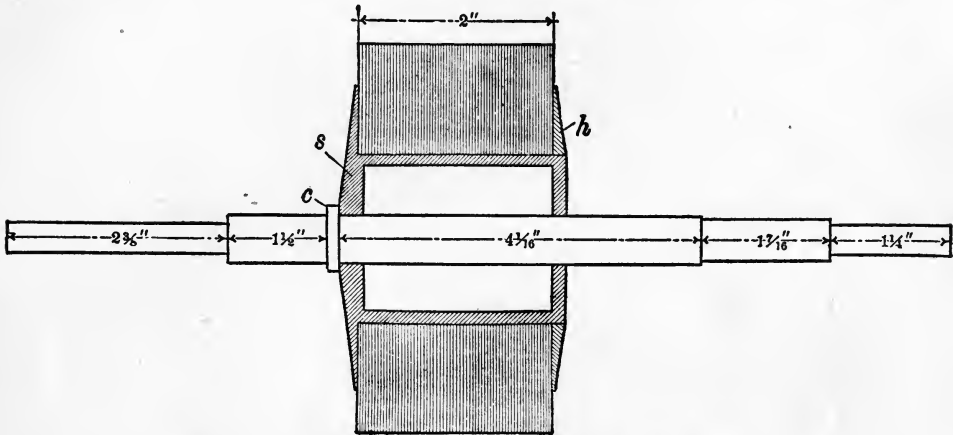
SHAFT AND CROSS SECTION OF ARMATURE CORE.
